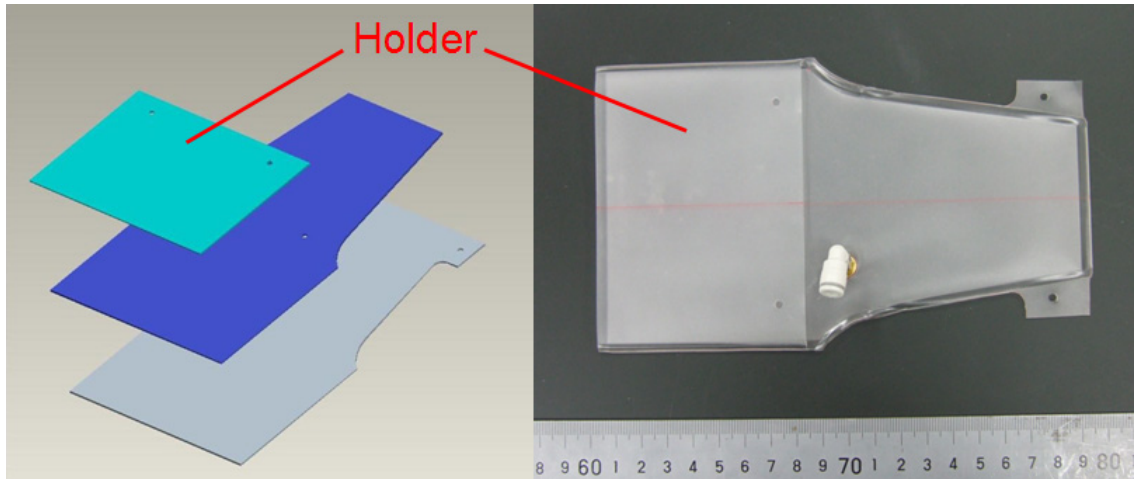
A prototype S/A bag (Type A) for HS crawler
